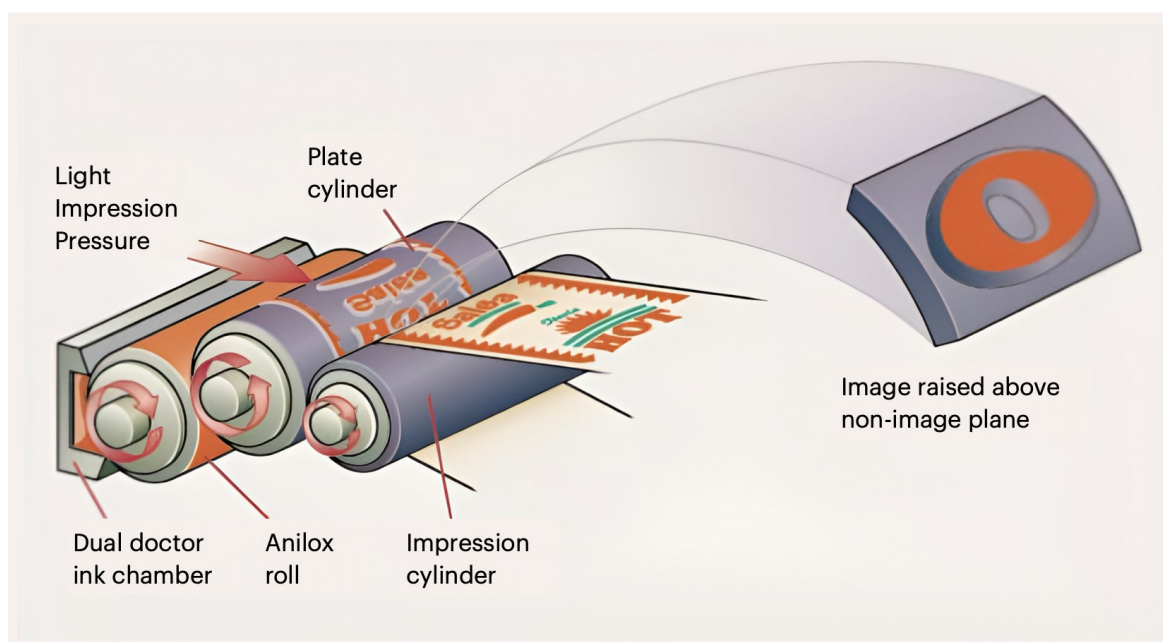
Schematic representation of flexographic printing method using roll-to-roll technique; Image from (35).
